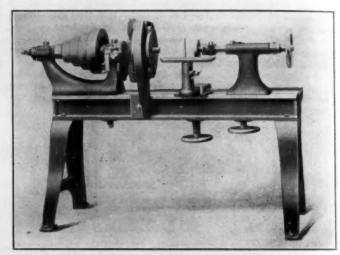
ELLIPTICAL CHUCK ON A METAL SPINNING LATHE.
